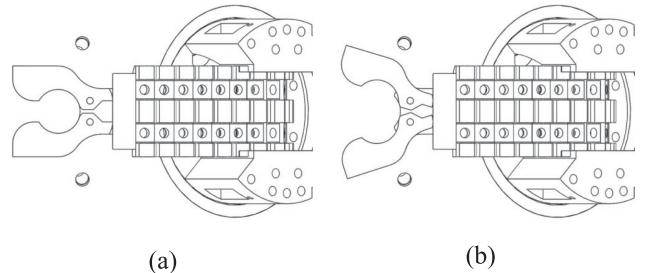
Design of the gripper for grasping the member end; (a) closed; (b) opened and unlocked.
